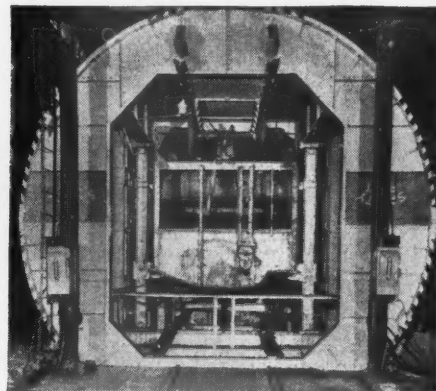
Turn-over fixture enables every weld to be made in a flat, horizontal position with the Automatic "Lincolnweld," assuring greater strength on each joint.
